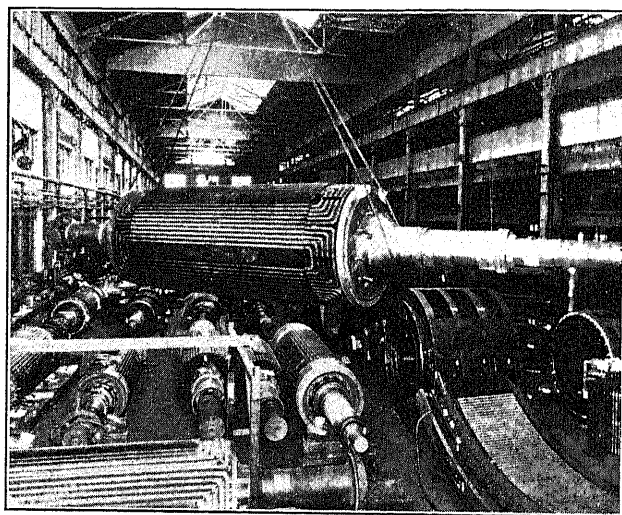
ROTOR OF 62,500-KV-A. 13,800-VOLT, 60-CYCLE, 1200 REV. PER MIN. STEAM TURBINE GENERATOR
